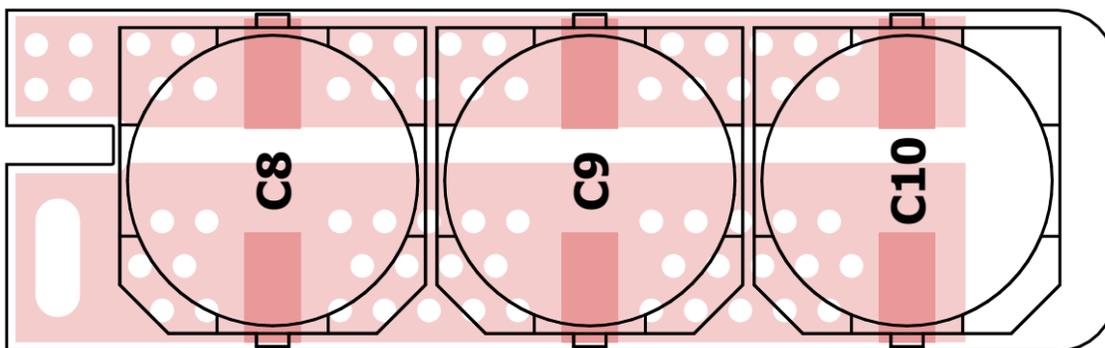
Output Capacitor Bank Printed Circuit Assembly Top
